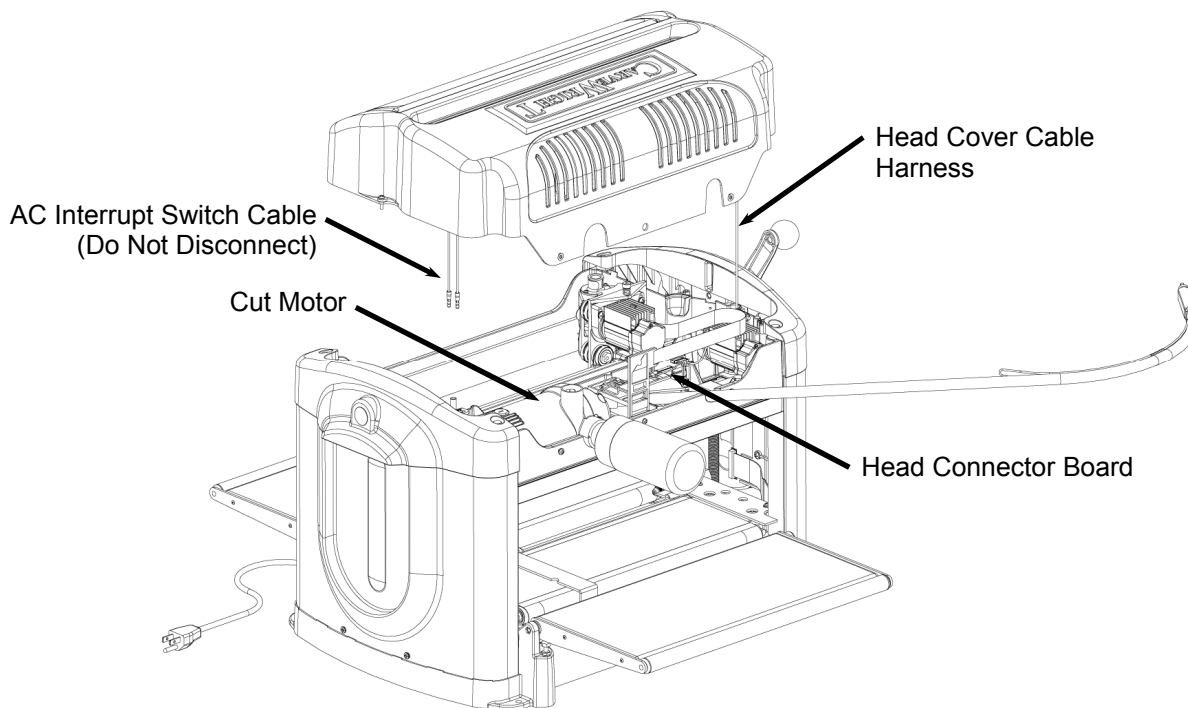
EXPLODED VIEW OF THE LIFTED COVER
